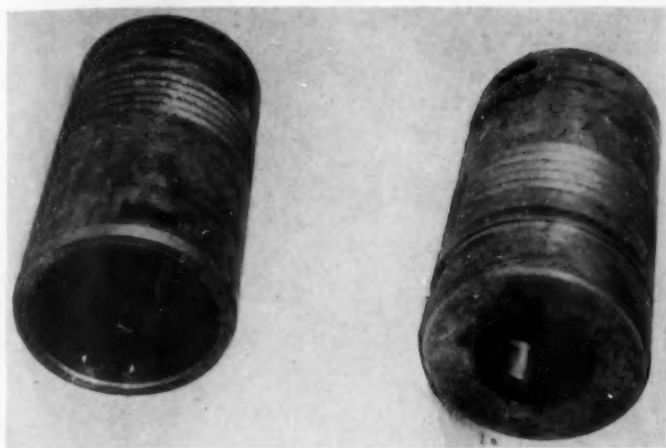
DIES FOR THE CYLINDER BARREL CASTING. LEFT—JIG FOR HOLDING PLUG FIRMLY IN PLACE. RIGHT—CORE INSERTED TO PREVENT SPLASHING.
